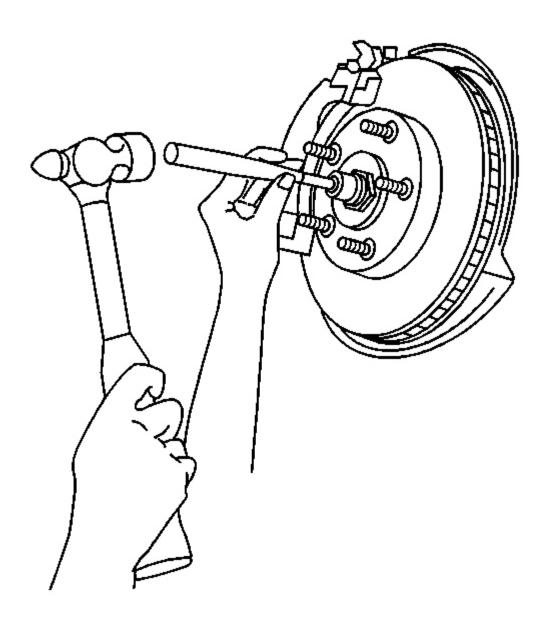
Disengaging Wheel Drive Shaft From Wheel Hub & Bearing Courtesy of GENERAL MOTORS CORP.
